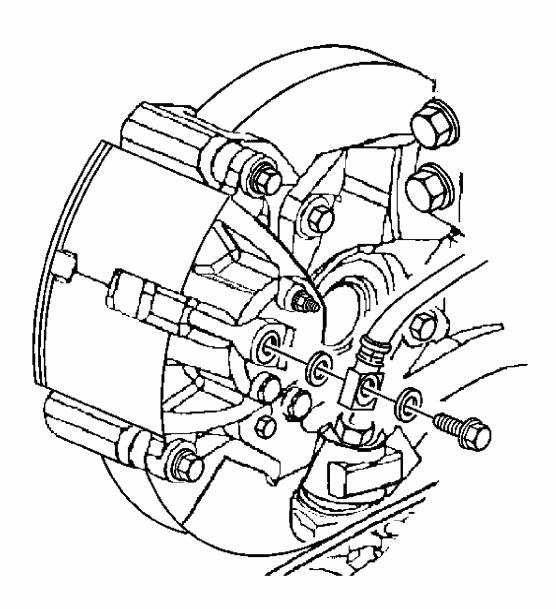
Brake Hose To Caliper View Courtesy of GENERAL MOTORS CORP.
